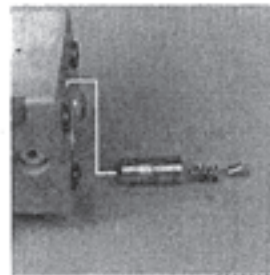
Remove Adjustment Spring and Pilot Piston
